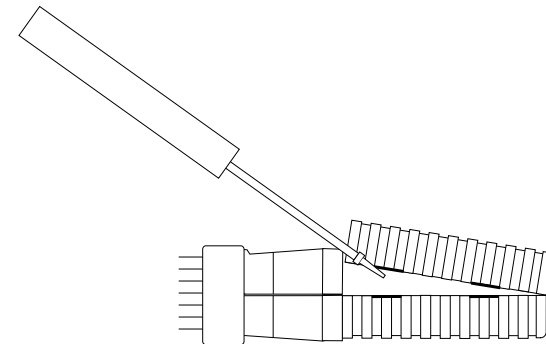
How to Use a Small Flathead Screwdriver to Finish Opening the Model 2400 Case
